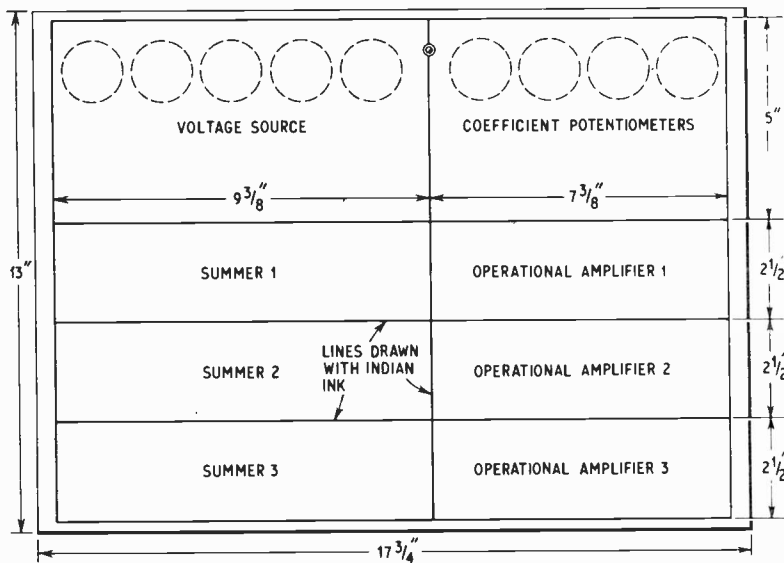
UNIT "A" front panel. Overall dimensions and sectional dividing lines
